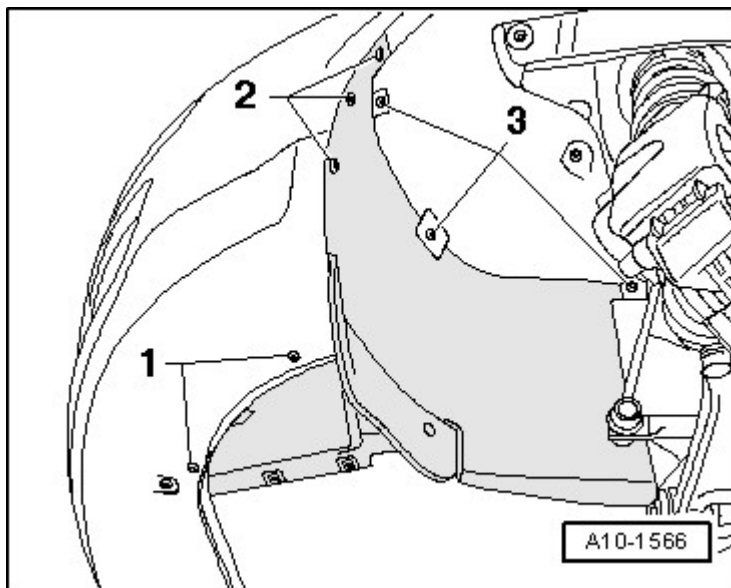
Identifying Removal Of Left And Right Front Part Of Wheel Housing Liner
